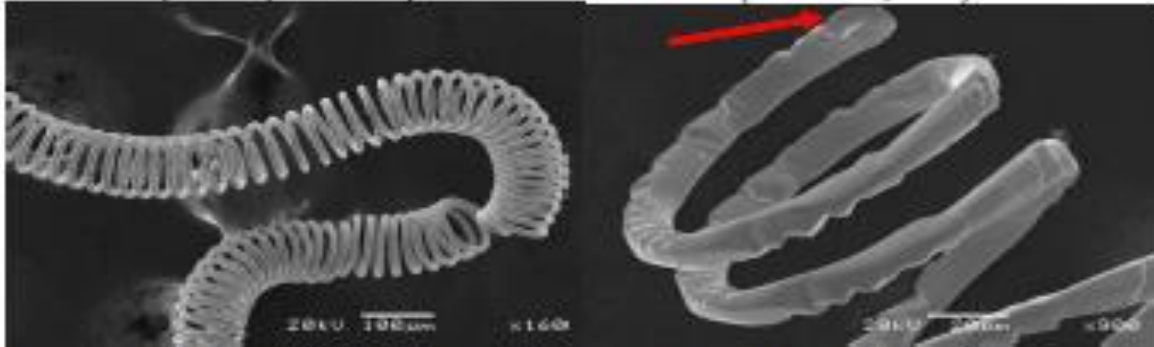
Hydraulic pressure light bulb filament condition (x160 - x900, SEM)
